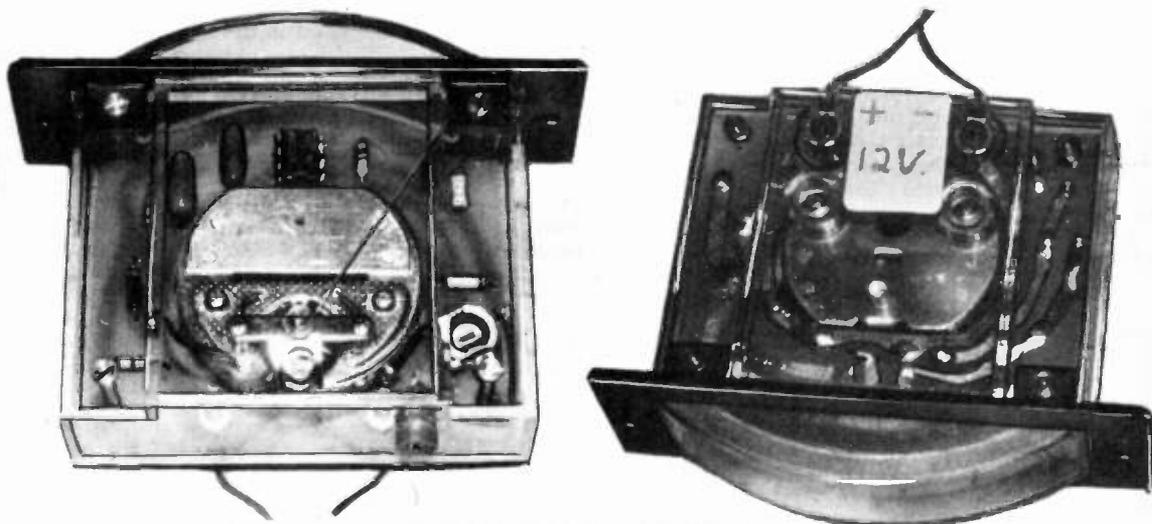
Construction of the Car Rev. Counter. Circuit board shown full size.
